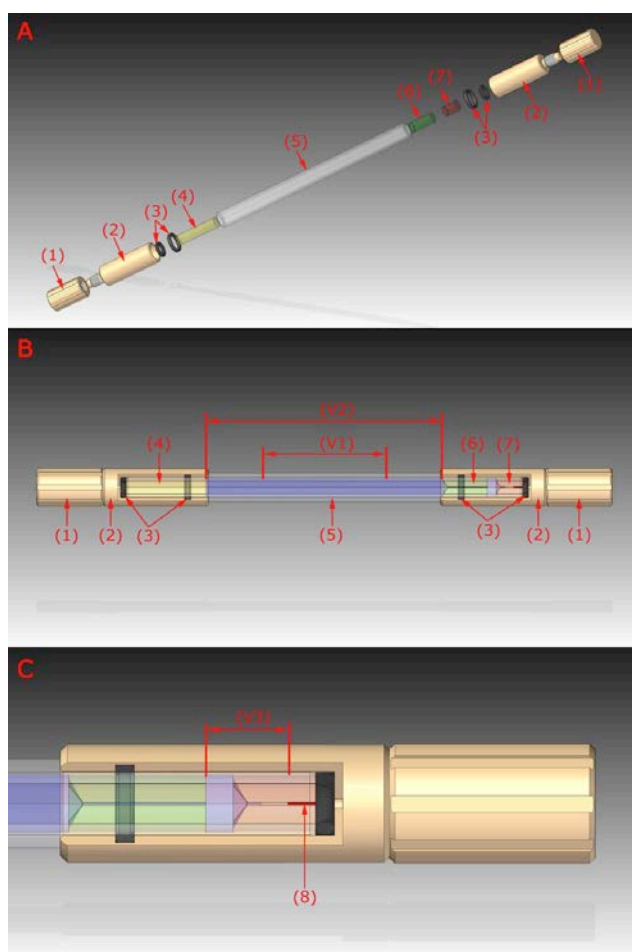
Schematic view of the shuttle container. A. Exploded view of all parts; B. Assembled shuttle container with glass parts and sample in blue; (1) End plug; (2) Glass connector; (3) Shock and vibration damper; (4) Bottom glass plug; (5) Shuttle glass tube; (6) Inner glass capillary; (7) Top glass capillary; (V1) active sample volume. (V2) Total sample volume. C. Details of the upper part of the shuttle container: (V3) Sample reservoir and bubble catcher; (8) Glue seal.
